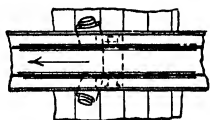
Guiding a Belt by Skewing the Inclined Pulleys.
